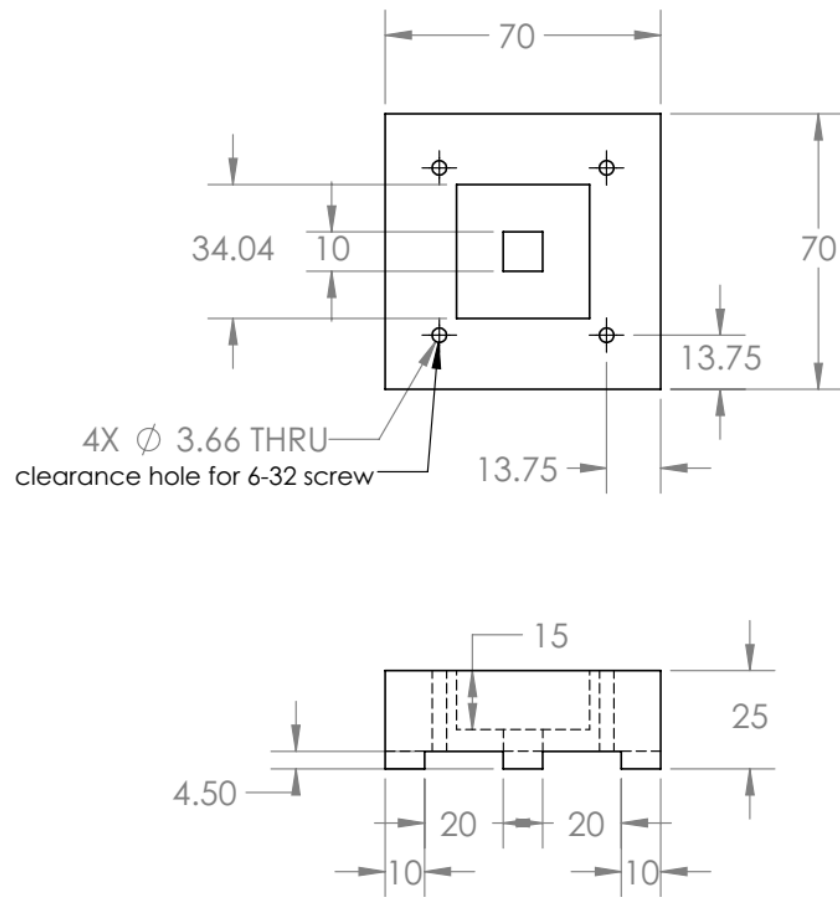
Technical drawing of the dam structure used to seal and avoid flooding over the top of the wick. All the dimensions are in millimeters.
